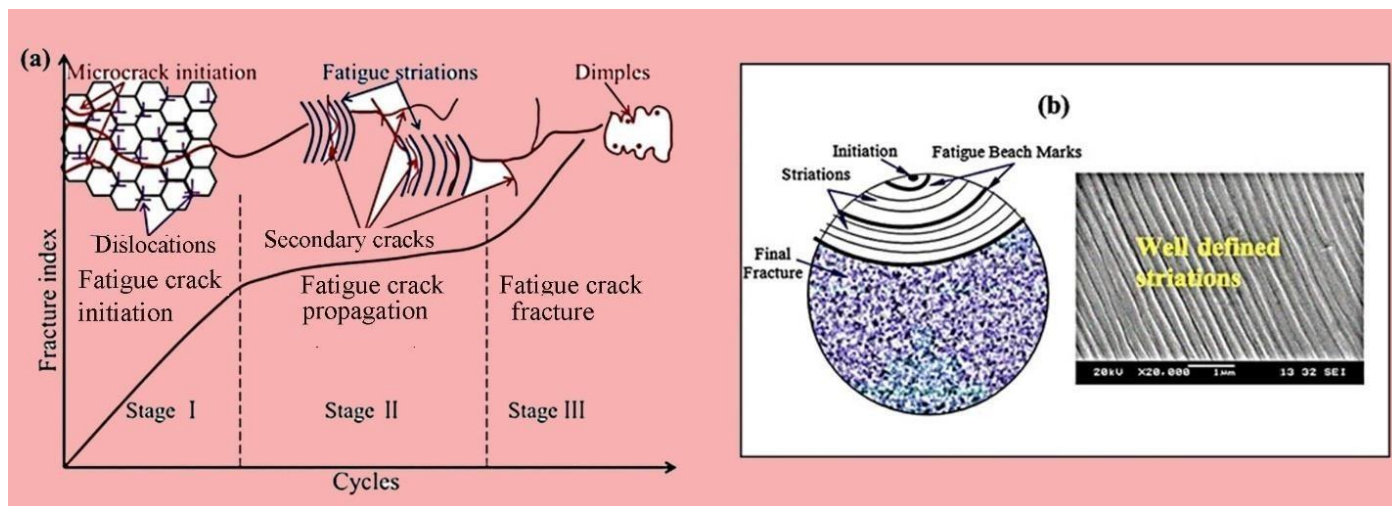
(a) Schematic illustrating the stages of the fatigue failure process [45], and (b) typical fatigue striations appeared in the fracture surface of Al alloy [46, 47].
